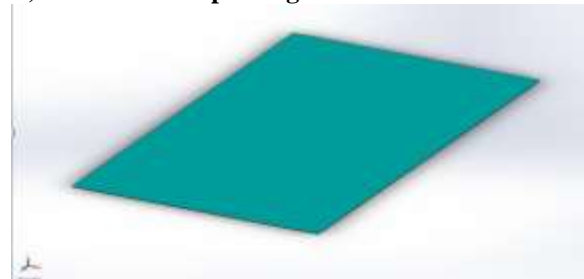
Floor beam of passenger cabin (snapshot taken from solid works)
